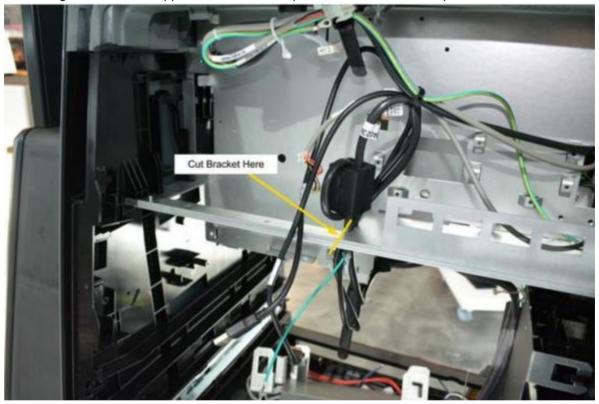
Cutting point on lower metal plate, opposite side of dispenser
